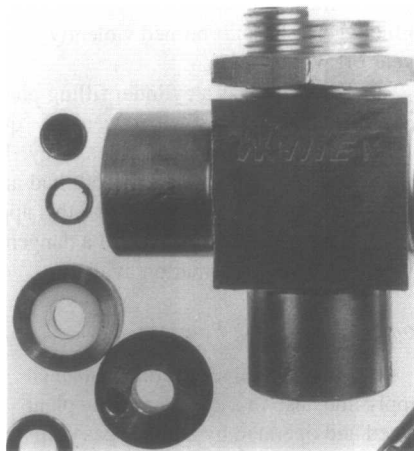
Compression heating in the ball valve burned all the TFE seats and contaminated the oxygen as it was being supplied to the patients.
